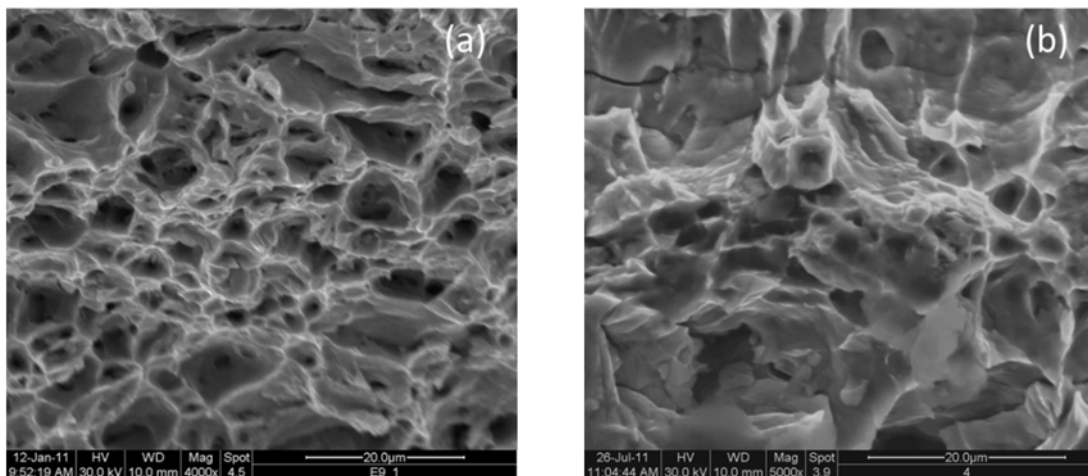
Images of fracture surfaces of the S185 steel grade: a) monotonic fracture [1]; b) ULCF fracture [1].
